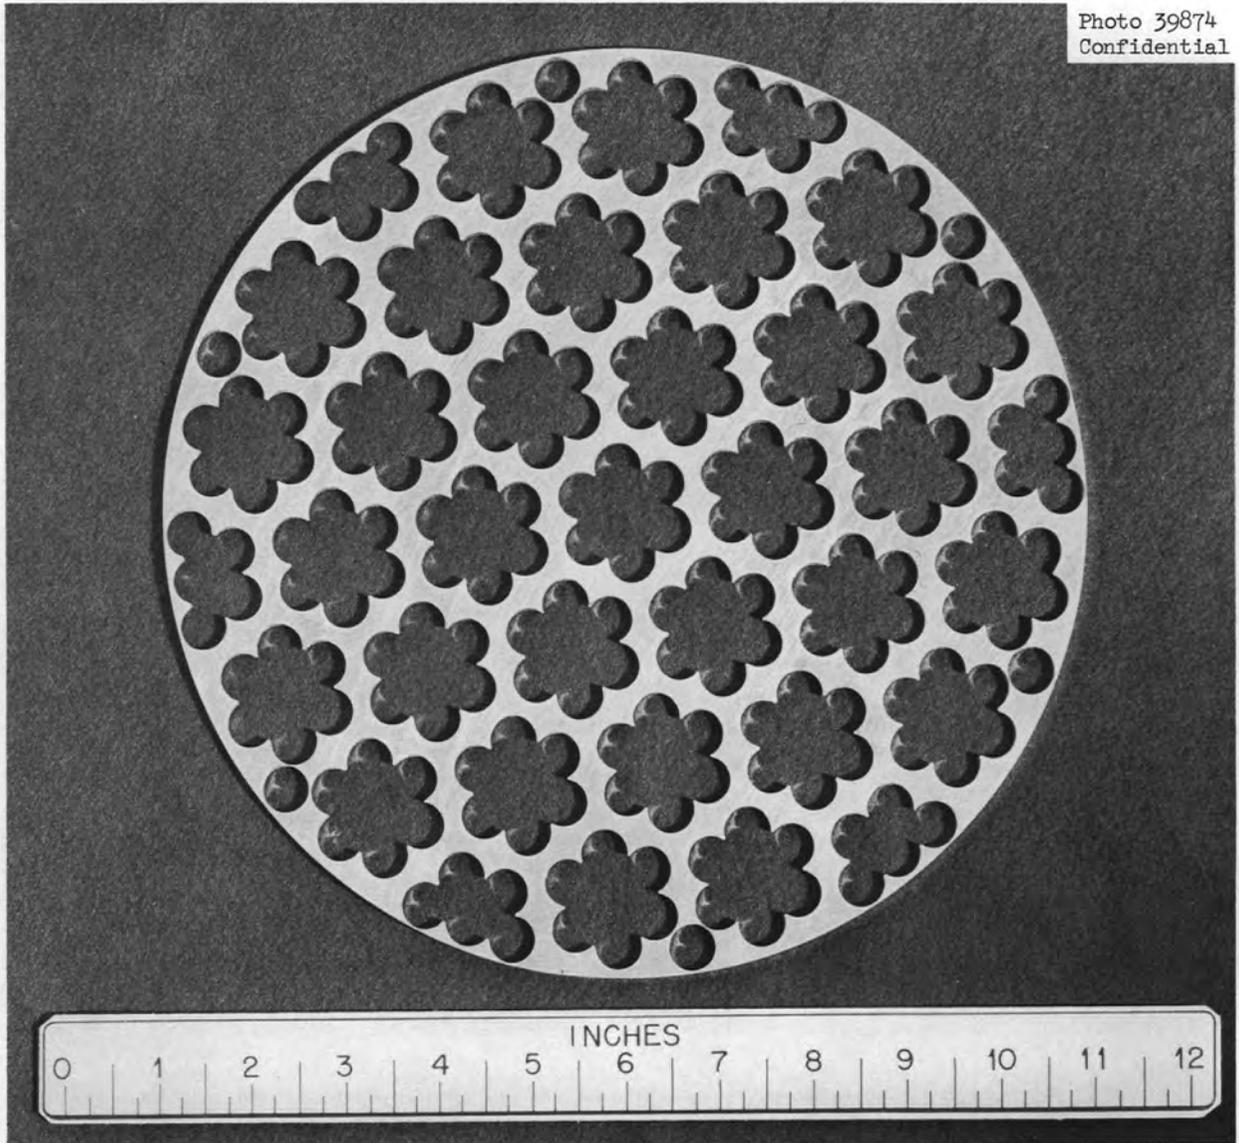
Grid Plate for the 7-Tube Cluster Assembly.
